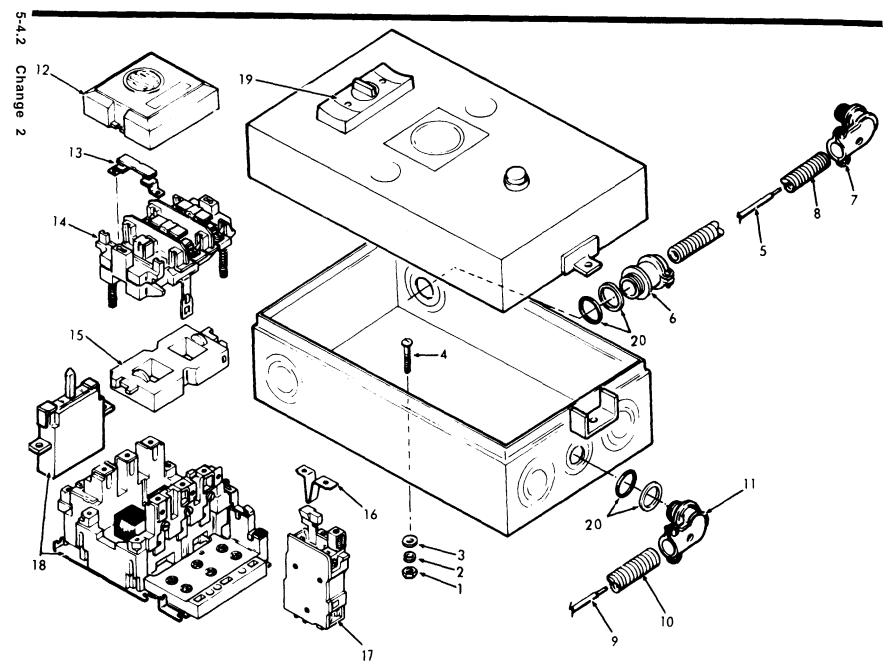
Magnetic starter assembly, exploded view (Model HR5-8M-4).
